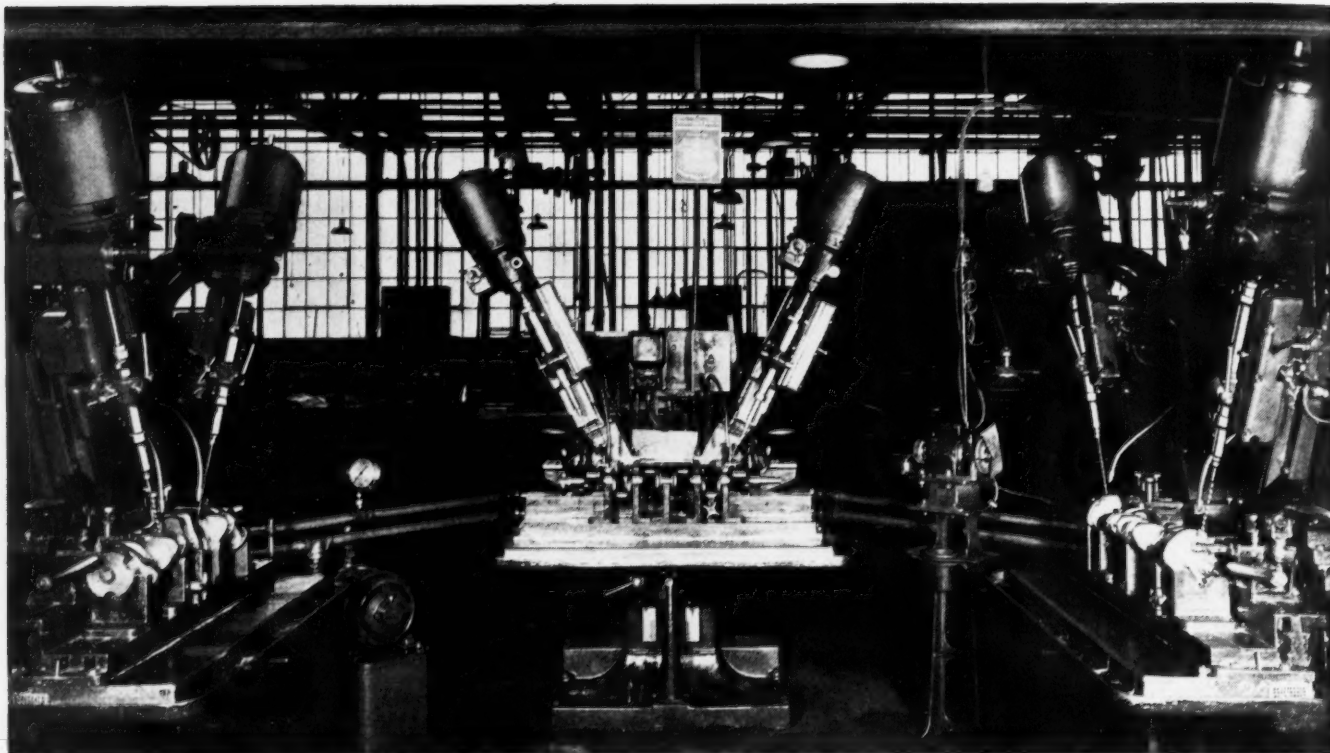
A Battery of Hydraulically Operated Deep-hole Drilling Machines which Employ the Step-by-step Method for Producing the Oil-holes in the Crankpins of Nash Crankshafts
